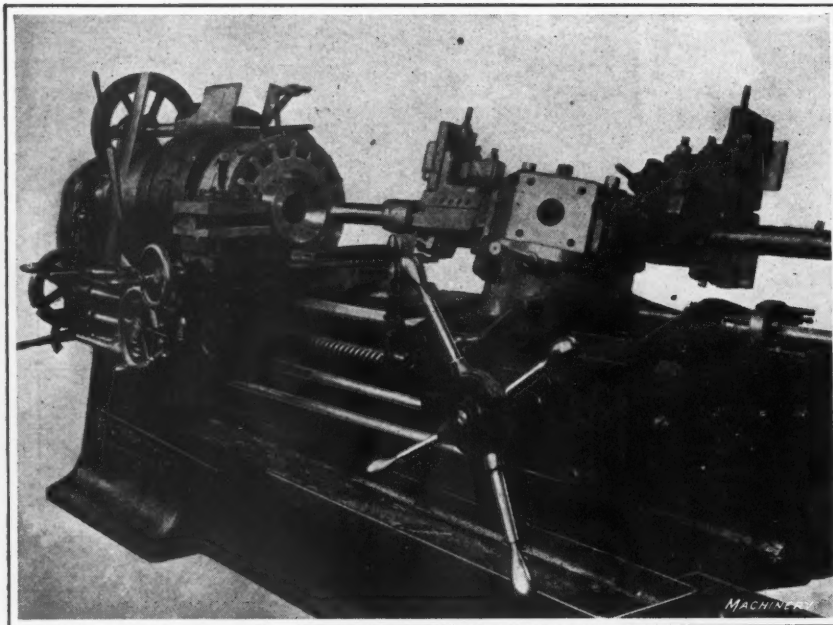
View showing Method of holding a Frail Part for machining on Turret Lathe
